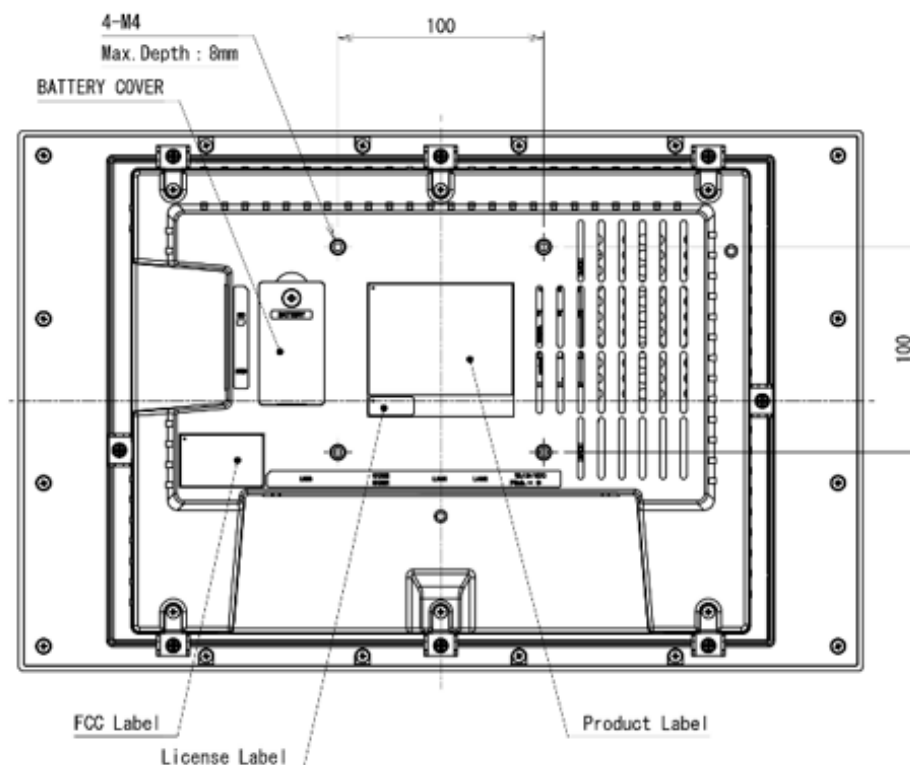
Rear View & Dimensions IC762CxS15Cxx
